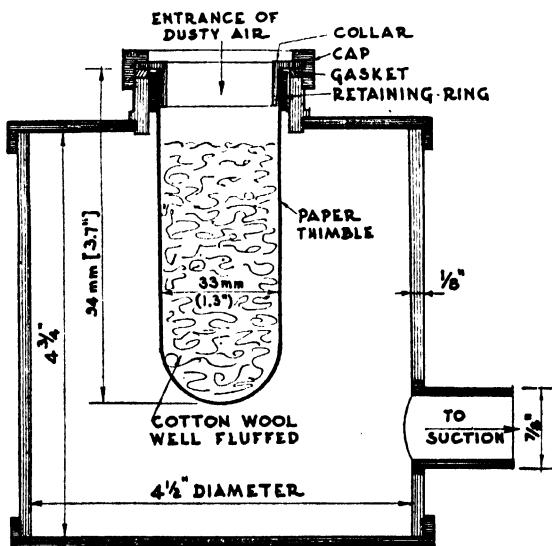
Details of paper thimble and suction capsule.⁴⁶
